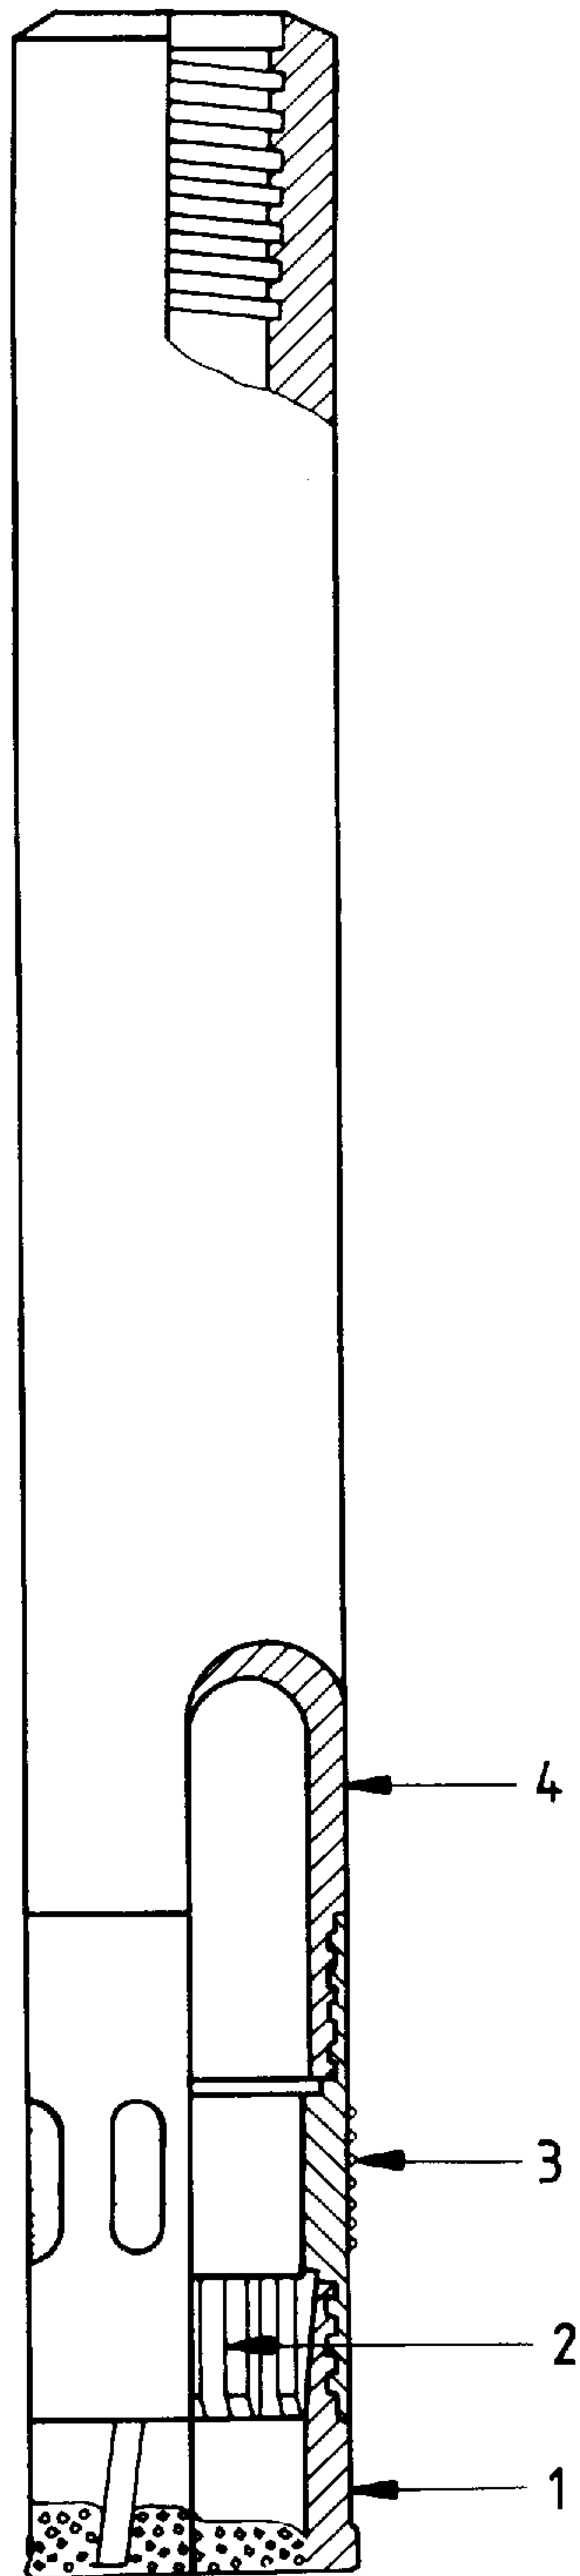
“WF” design double-tube core barrel – Head (see table 27)
